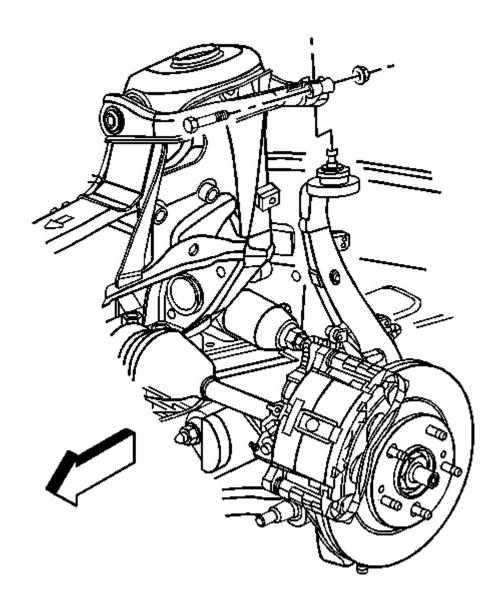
View Of Upper Control Arm To The Steering Knuckle Pinch Bolt And Nut Courtesy of GENERAL MOTORS CORP.
